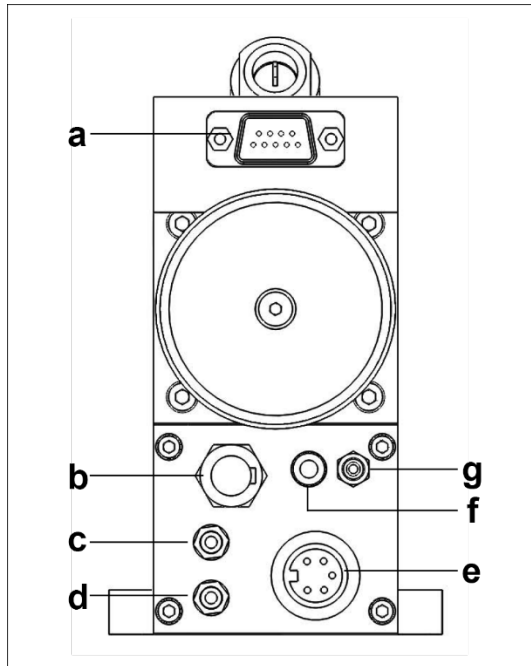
Connections on the SK-5AP and/or SK-5AP/KS stud welding head
